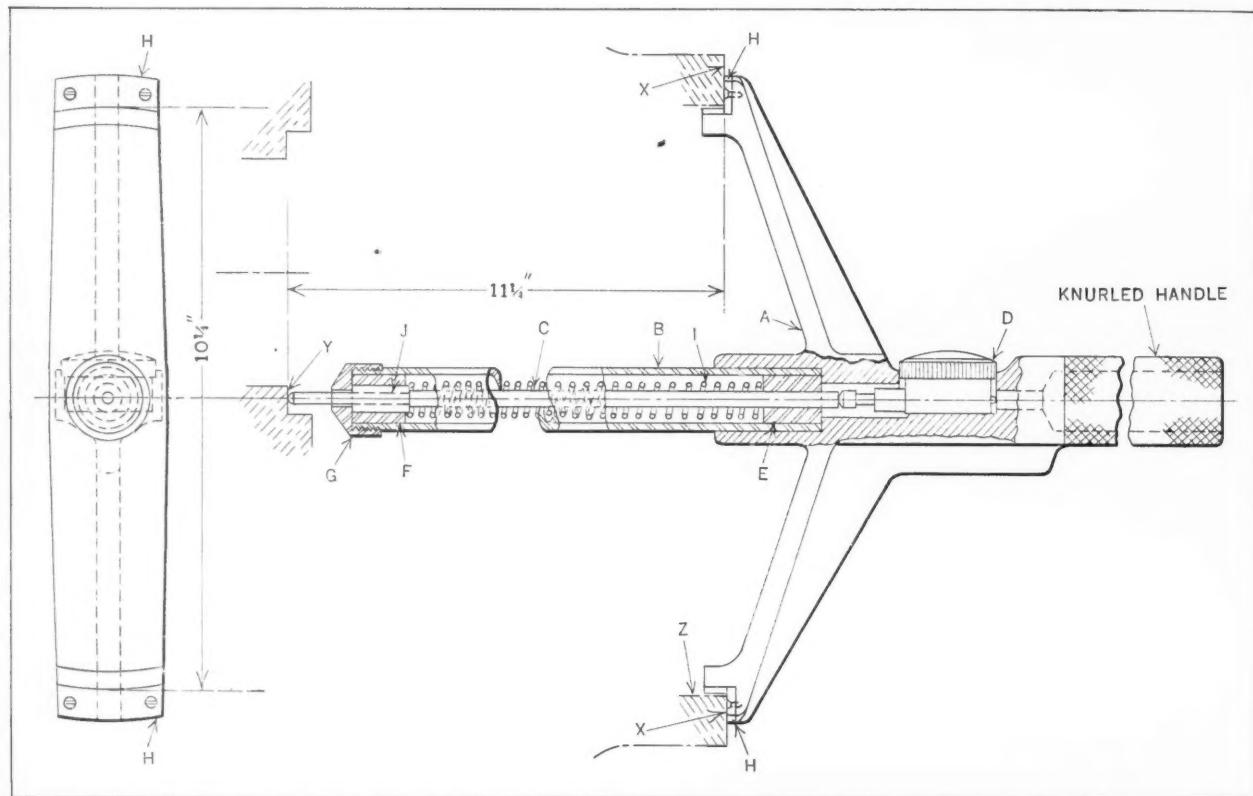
Gage with Dial Indicator for Testing Depth of Ball-race Seat below End Face of Crankcase
